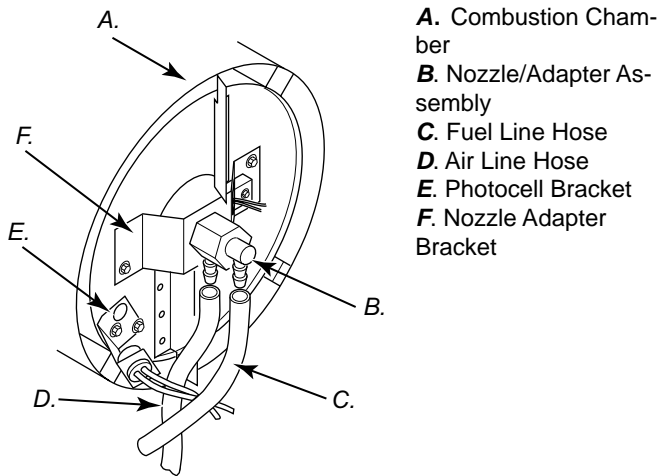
Removing air and fuel line hoses, 35.000 and 70.000 Btu/Hr Models.
